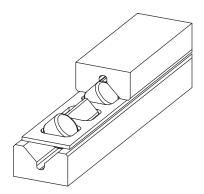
Non-recirculating linear roller bearing, linear guideway, crossed roller type
